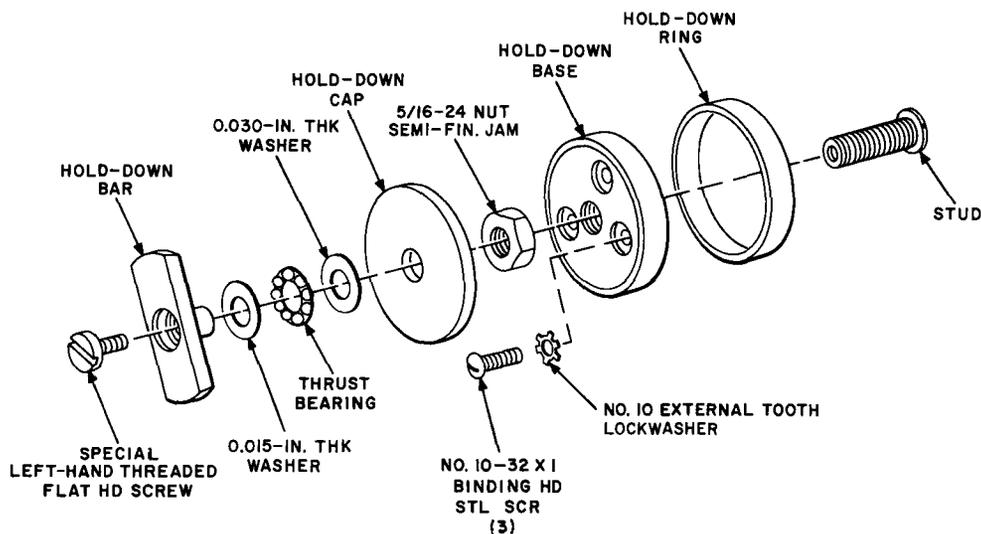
KS-19125, L 101 Reel Hold-Down Knob — Exploded View
